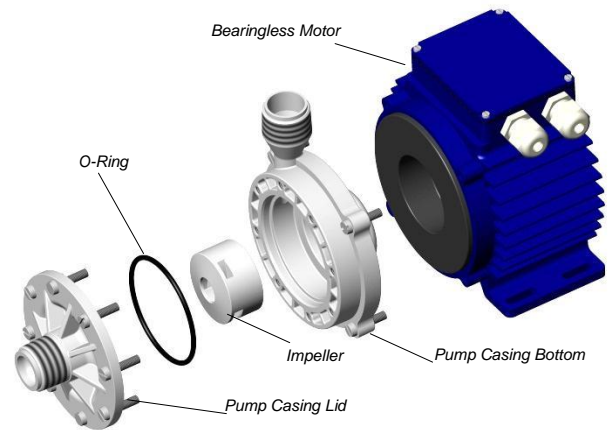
Disassembled pump head LPP-600.13 (PVDF)
